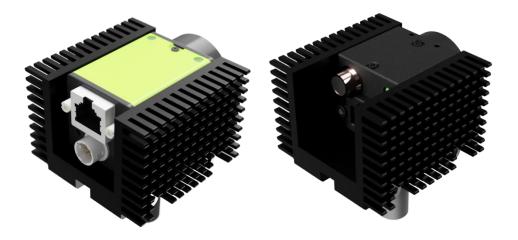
Left: Heat sink with mounted camera JAI, Right: Heat sink with mounted camera FLIR
